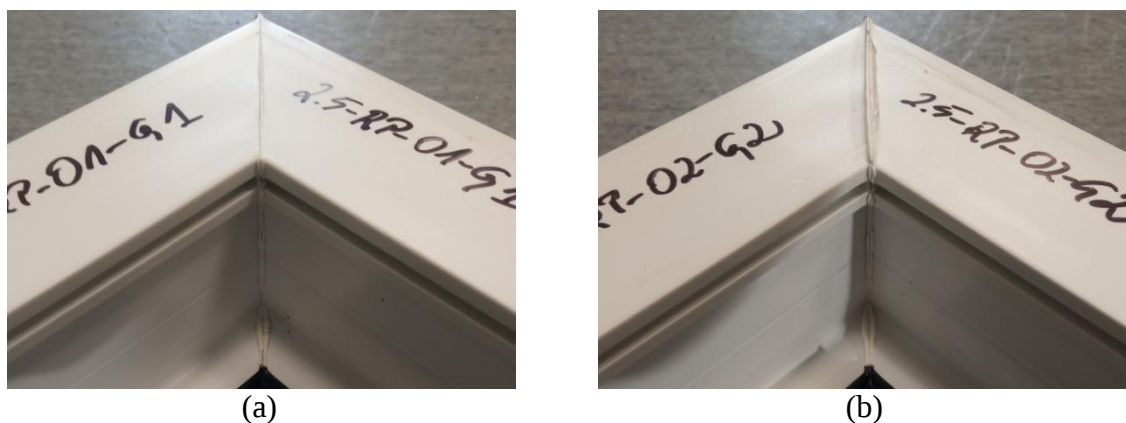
Selected welds from test specimens produced with composite milling to a depth of 1.5 mm: (a) welded using head 1, (b) welded using head 2 [13]
